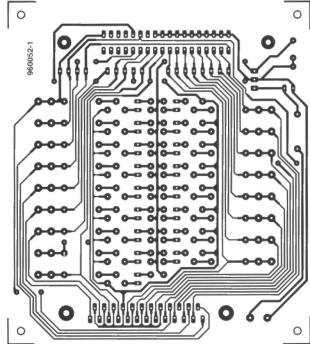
Track layout and component mounting plan (90%) of the printed circuit board designed for the Centronics interface (board available ready-made, see page 70).
